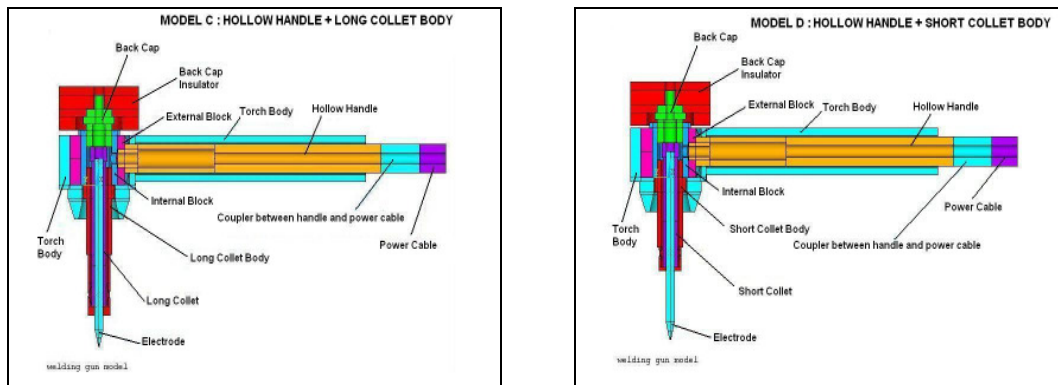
Cross-sectional view of welding torch model C and D.
